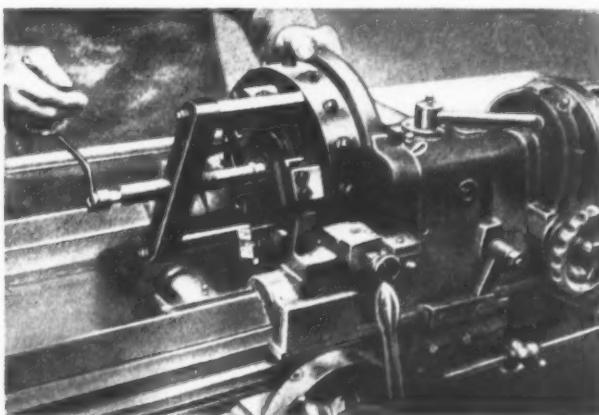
Method of Using Puller when Removing Interchangeable Multiple Tool-plate
